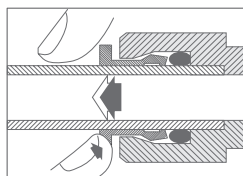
When removing the hose, complete the task by pressing the collet.
